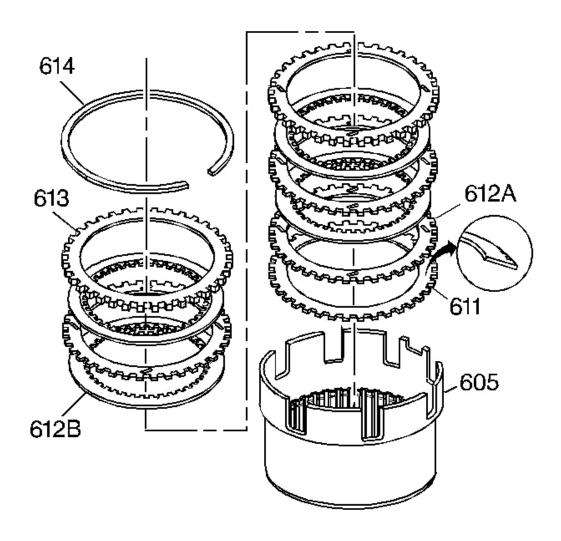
Locating Reverse Input Clutch Plates Courtesy of GENERAL MOTORS CORP.
